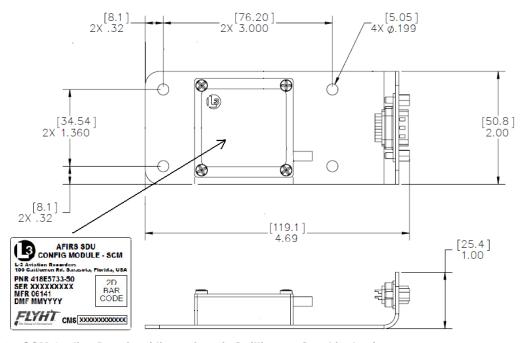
SCM Outline Drawing (dimensions in [millimeters] and inches)
